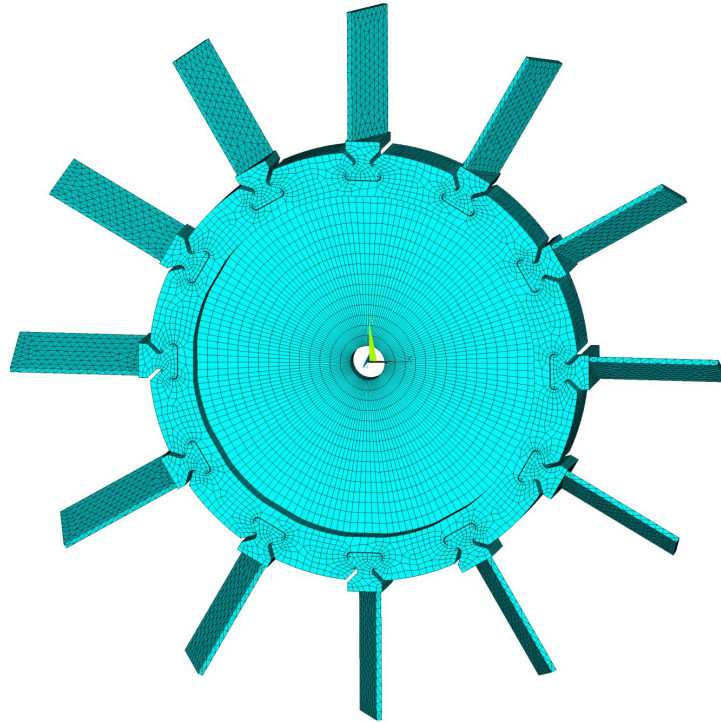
Full wheel FE model of the mock up bladed disk with friction interfaces at blade-root joints.
